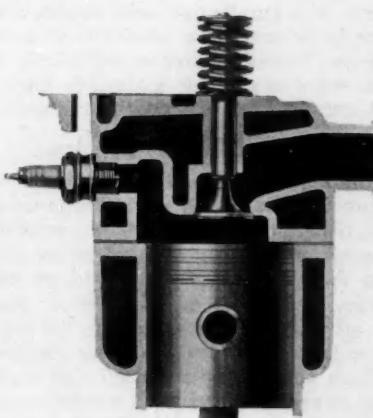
COMBUSTION-CHAMBER OF CHEVROLET ENGINE
